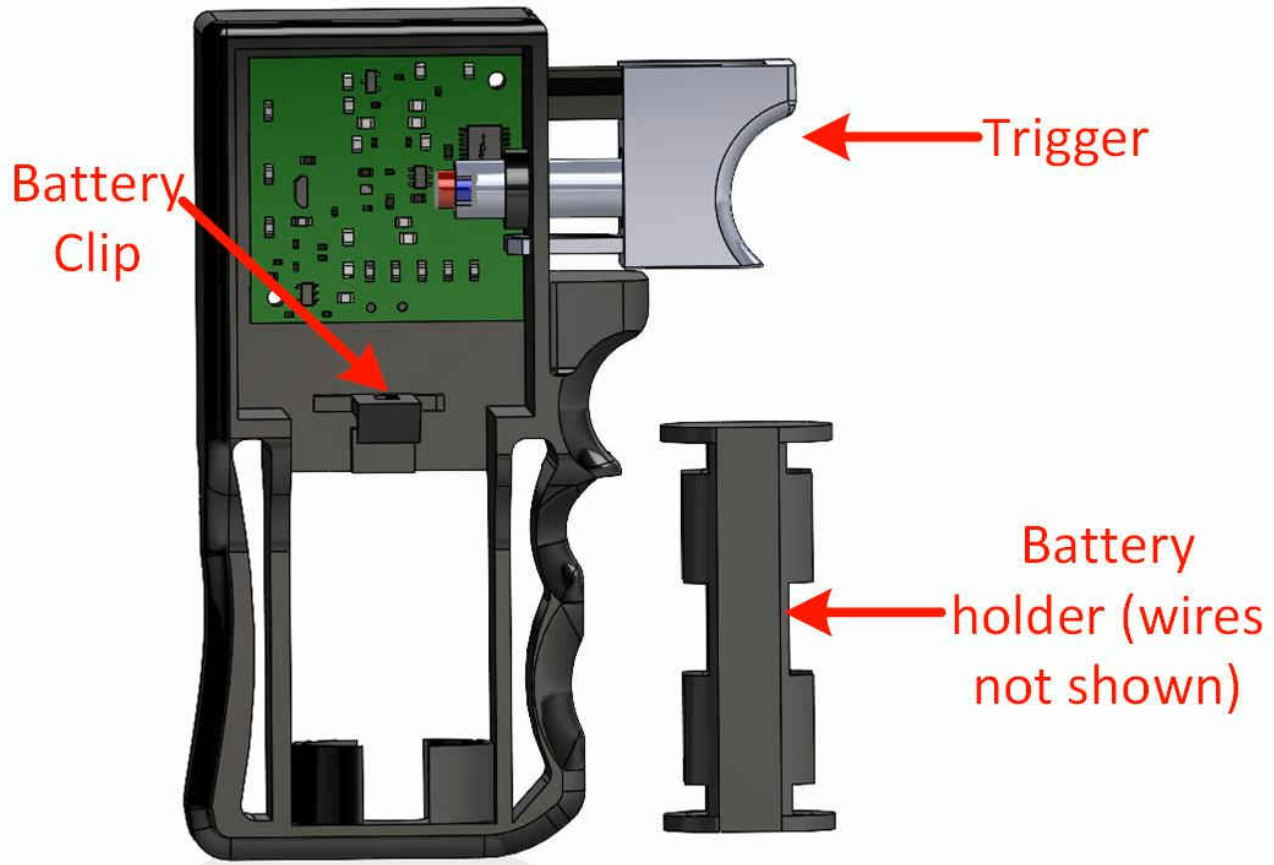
Front View With Battery Holder Outside Trigger Module
